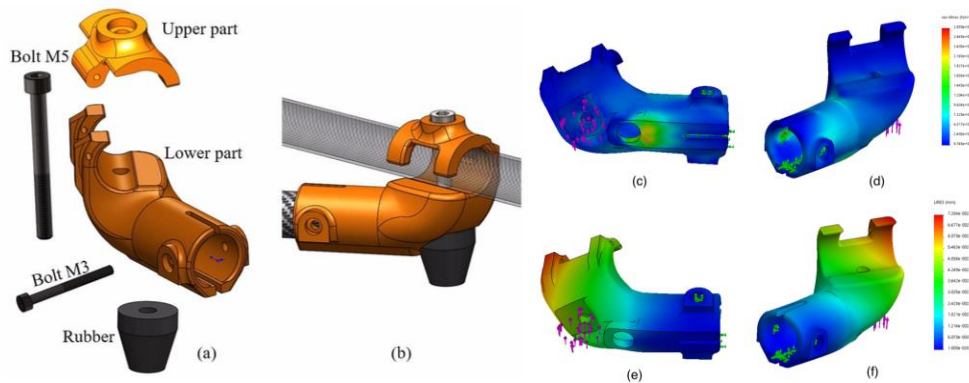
Connecting joint side frame (a), assembly side frame connecting joint (b), connecting joint stress analysis: bottom view (c), side view (d) and displacement analysis: bottom view (e), side view (f)
